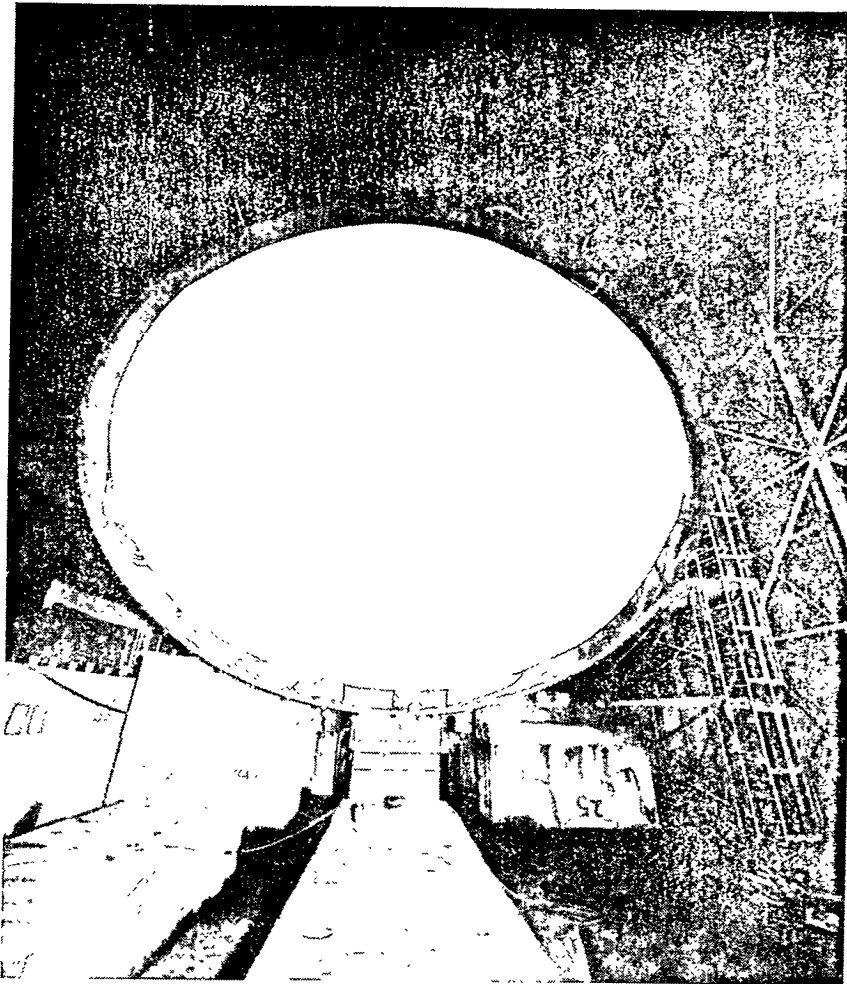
AFT SECTION SSBN 619 AFTER MISSILE COMPARTMENT REMOVAL
